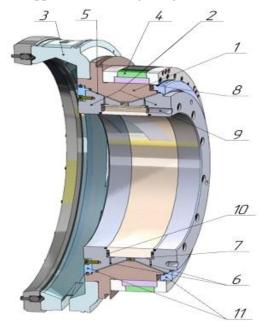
Model of a single-supported non-contact spindle assembly of a semi-automatic single-crystal cutting machine:
